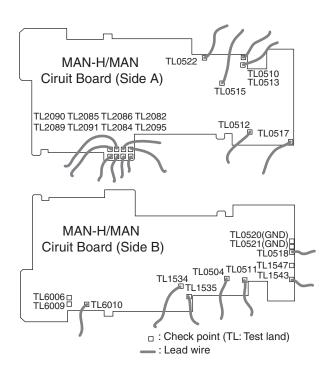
Lead wire soldering of MAN-H/MAN circuit board
